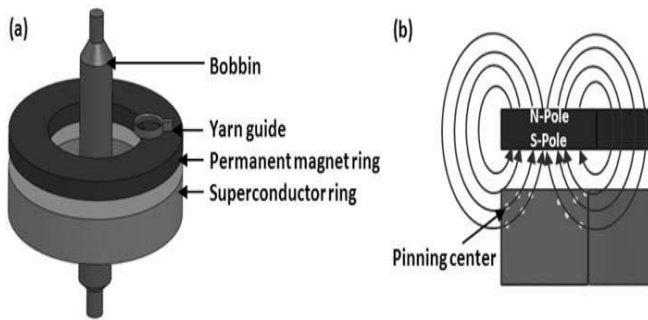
Superconducting magnetic bearing, SMB1: (a) topology; (b) cross-sectional view of SMB1 [2].
